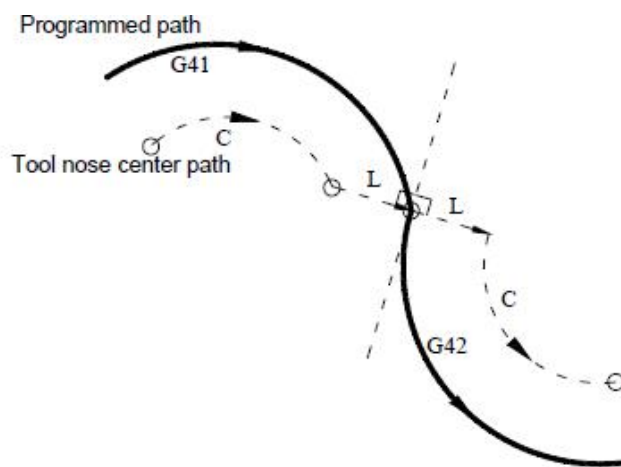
Circular—circular without intersection (changing compensation direction)
